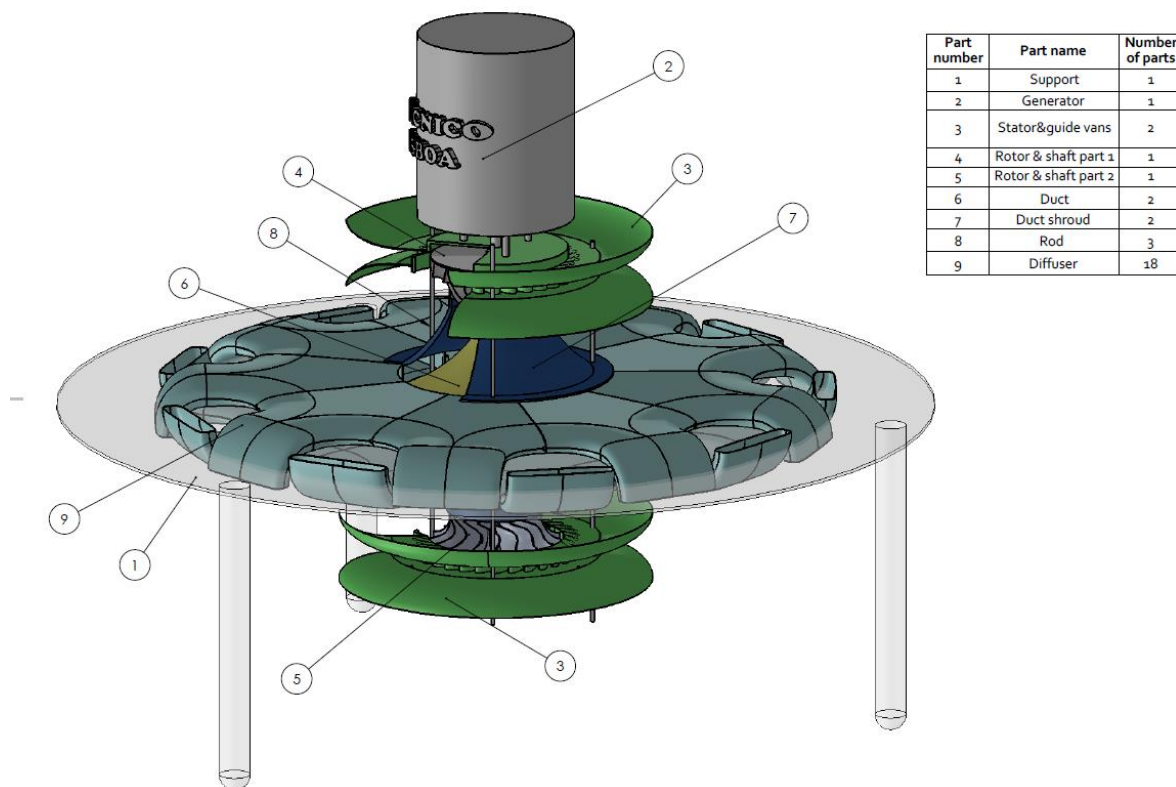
TETRA-RADIAL AIR TURBINE DRAWING
